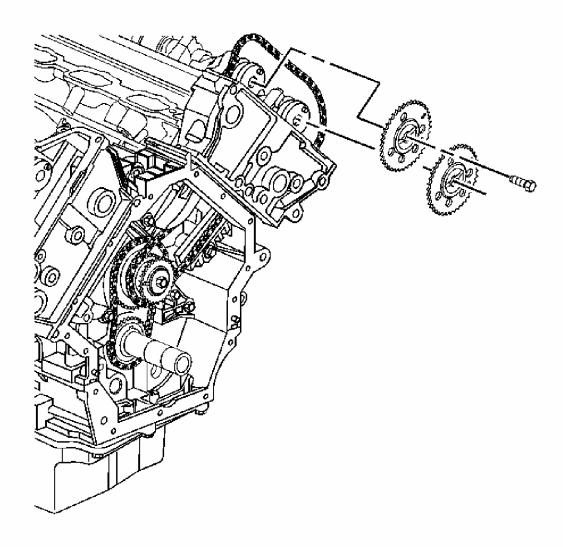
Identifying Left Exhaust Camshaft Sprocket Bolt Courtesy of GENERAL MOTORS CORP.
